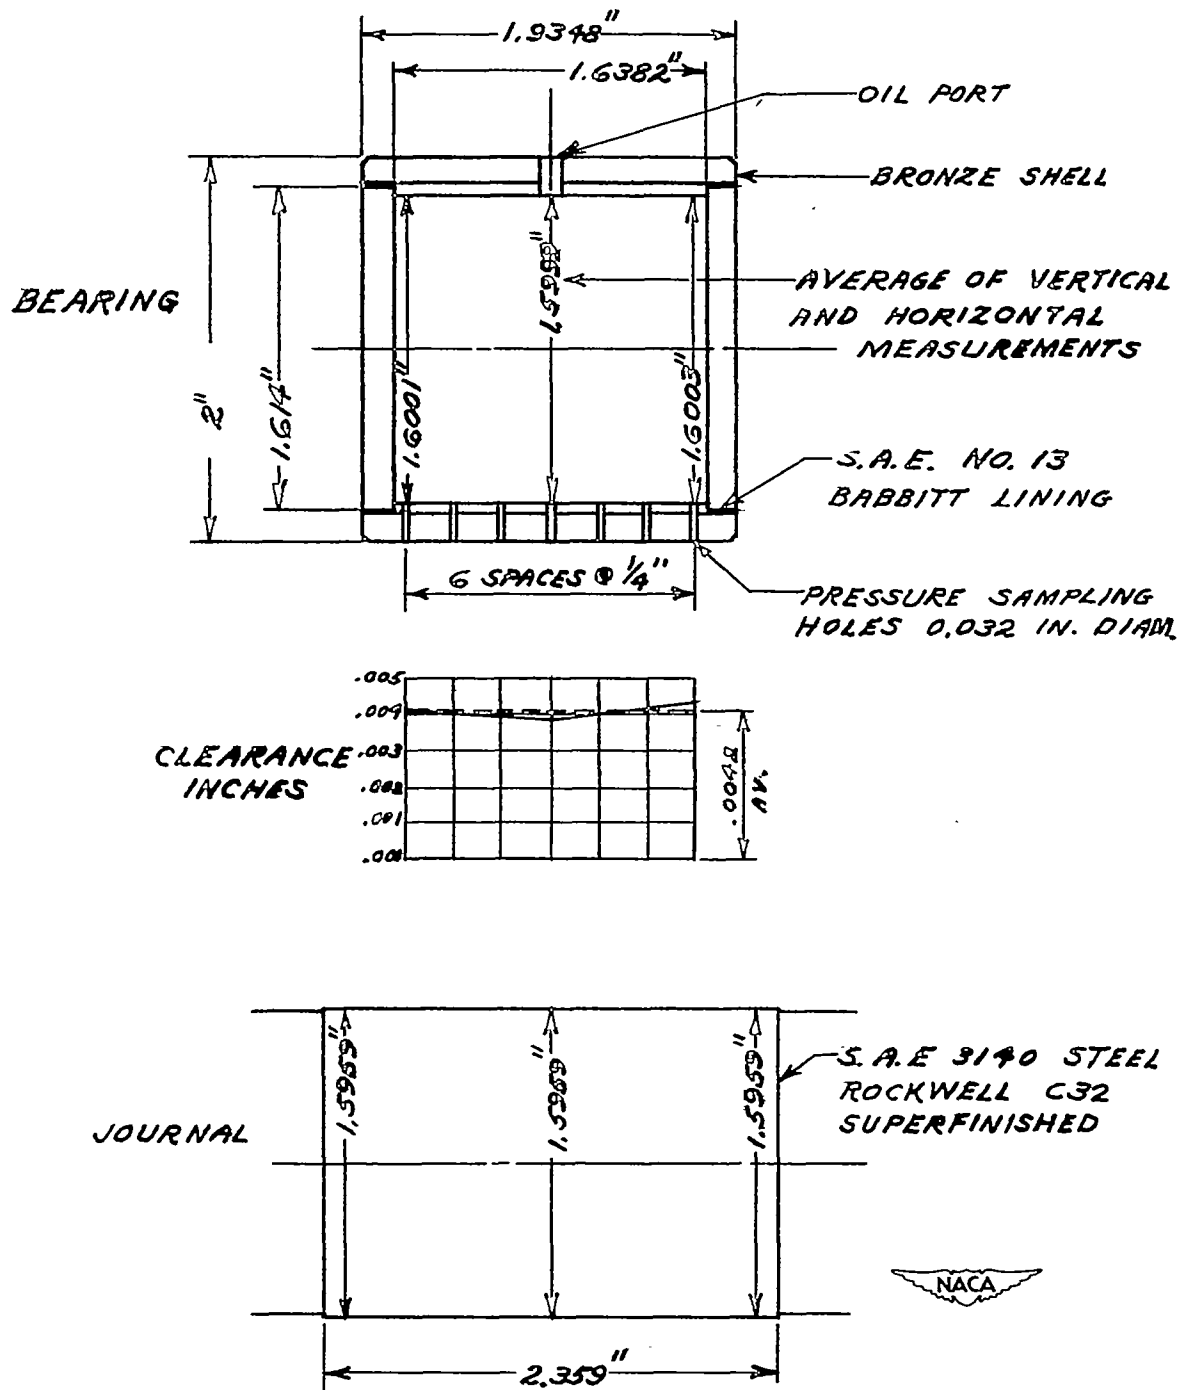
Dimensions and clearance of test bearing 3 and test journal 3.
